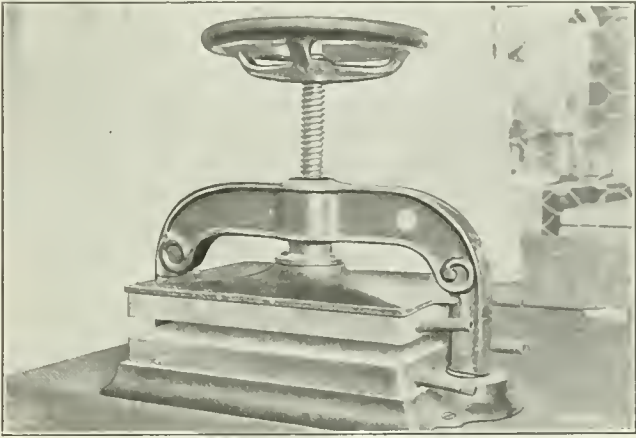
Letter Press fitted with Water-cooled Platens for Straightening Side Frames preparatory to Grinding
